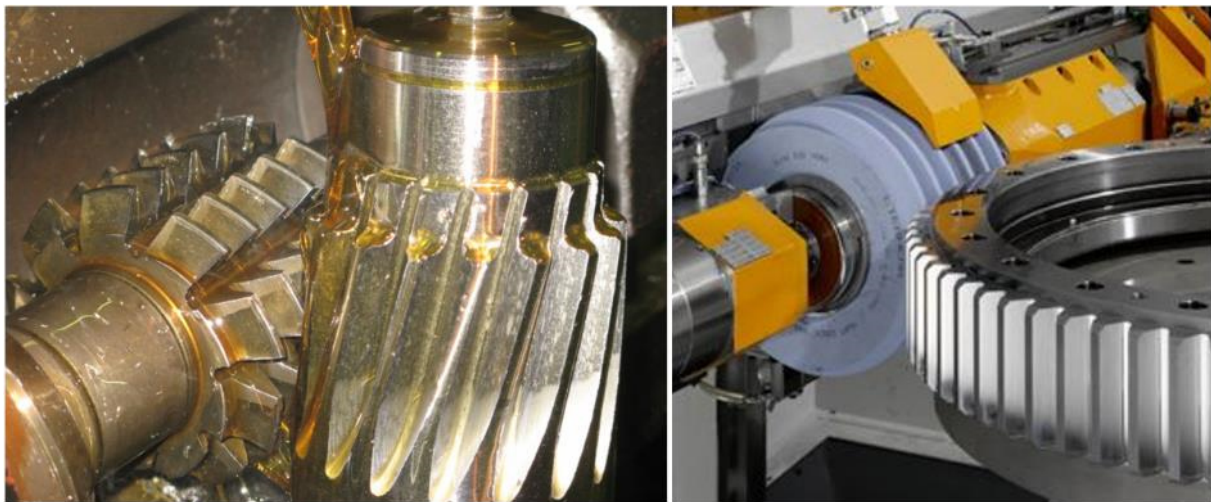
Typical gearing manufacturing process – milling (left) and grinding (right) [3], [4].
